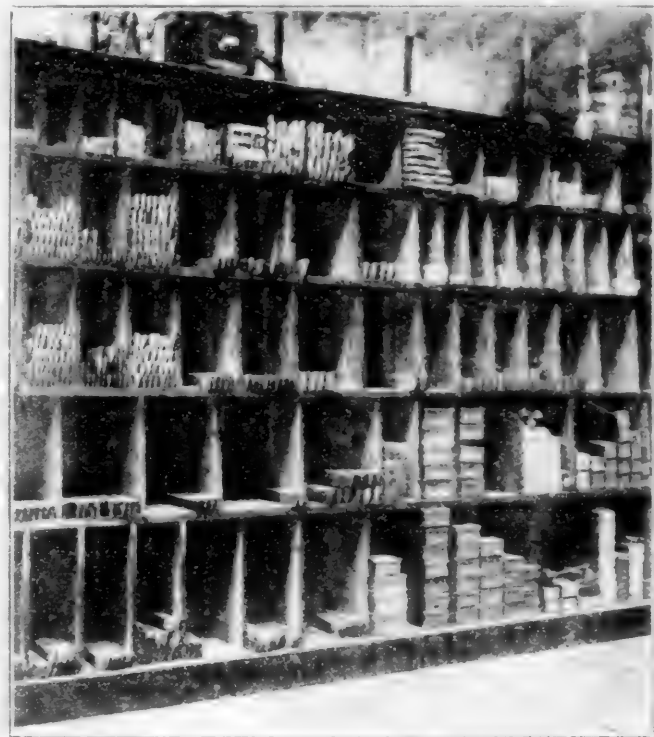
PART OF TOOL ROOM CONTAINING LATHE, PLANER AND BORING TOOLS.
